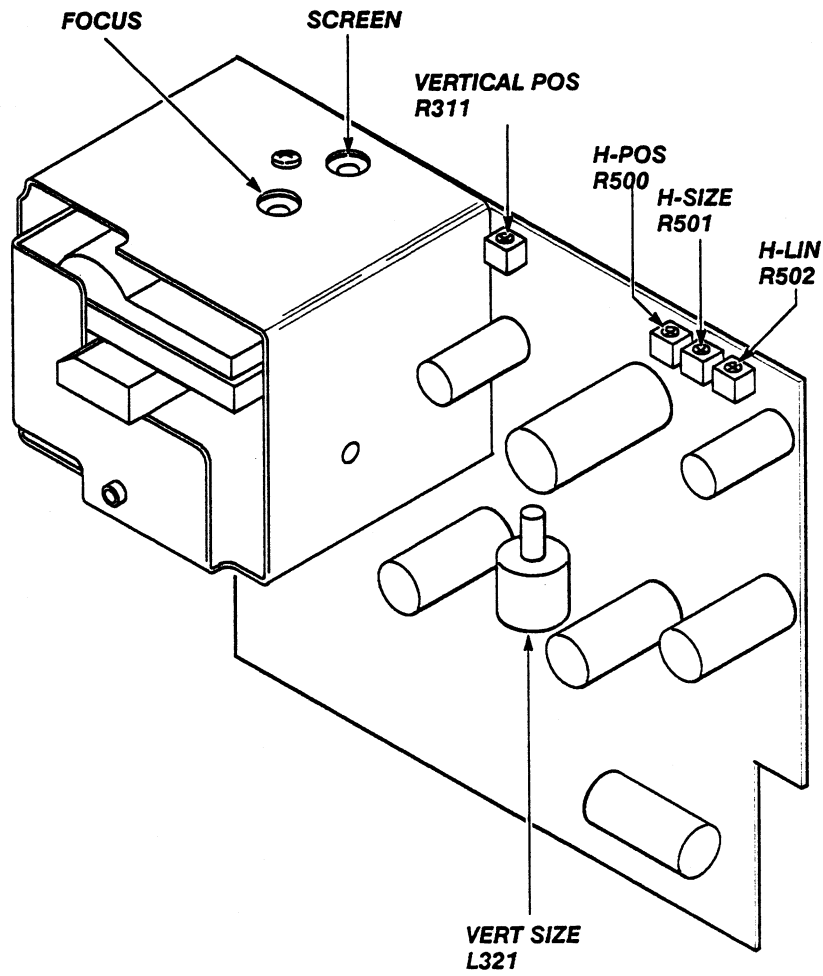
A8 CRT Driver Board Adjustment Locations
